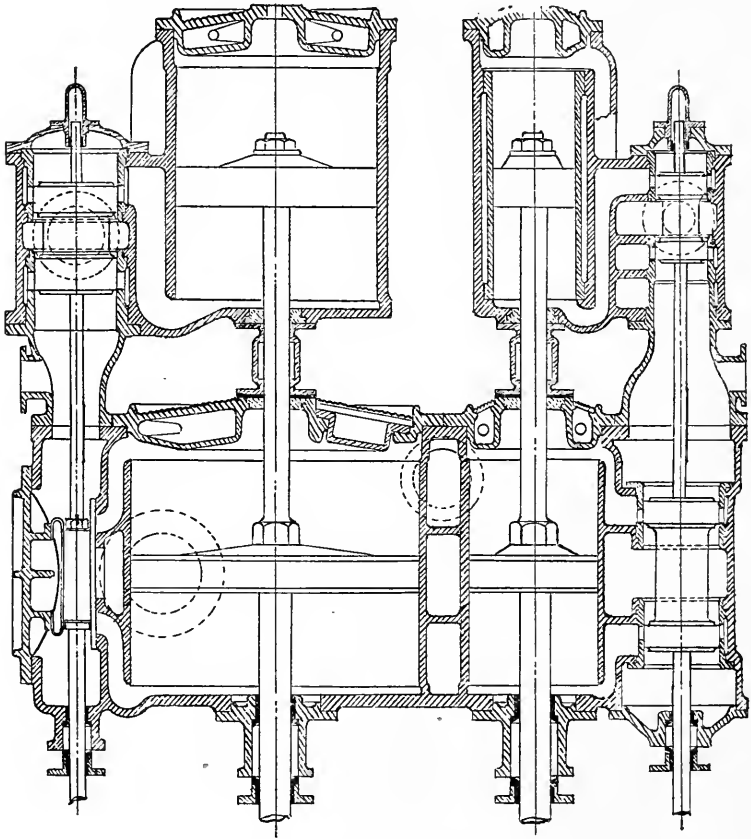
Cylinders of a Two-Crank Quadruple-Expansion Engine.
